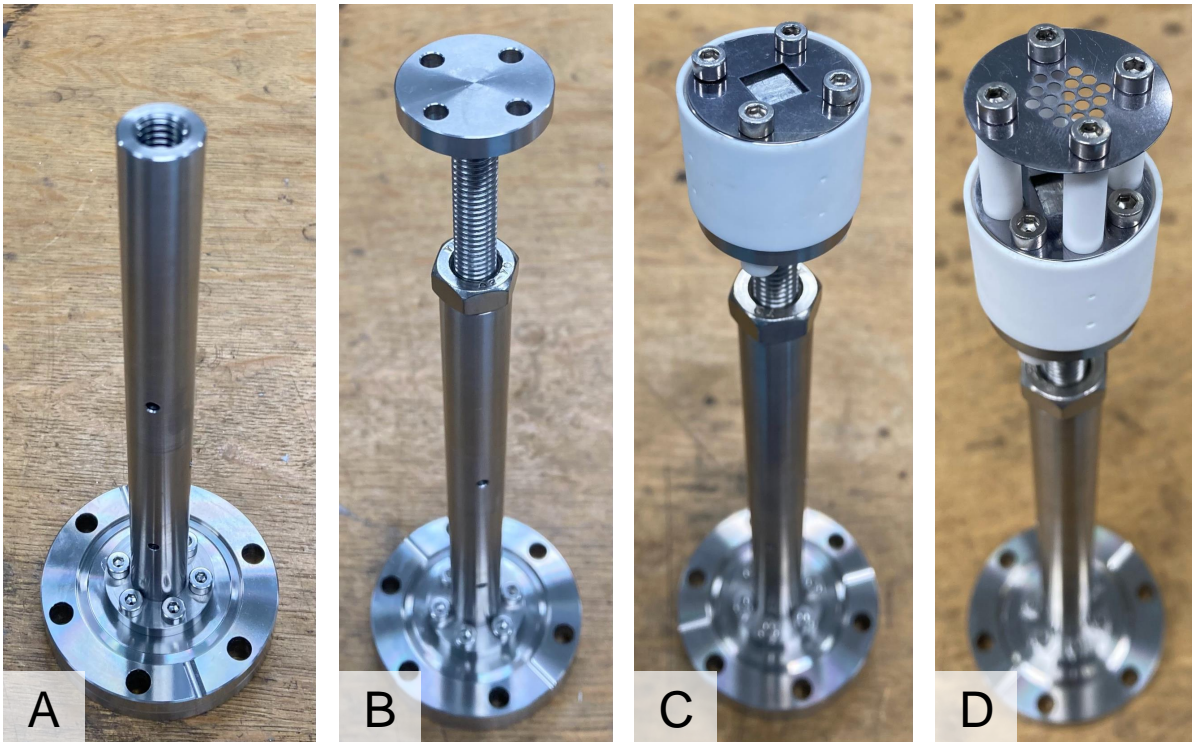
Assembly of the sample stage. A - Sample stage mount secured onto 2.75" blanking flange. B - Base plate with locking nut added. C - Insulating block, sample plate, and sample window added, full assembly without grounded grid. D - Full assembly including grounded grid.
